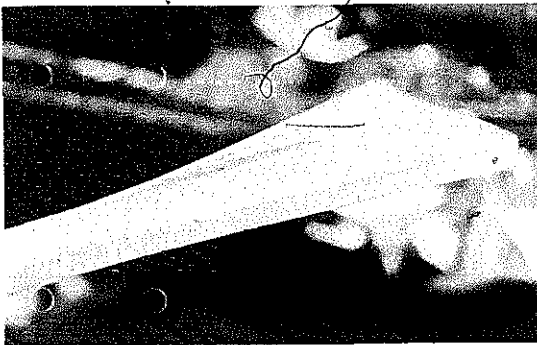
This is the cheekpiece after being cut out. Now only sanding is needed.
